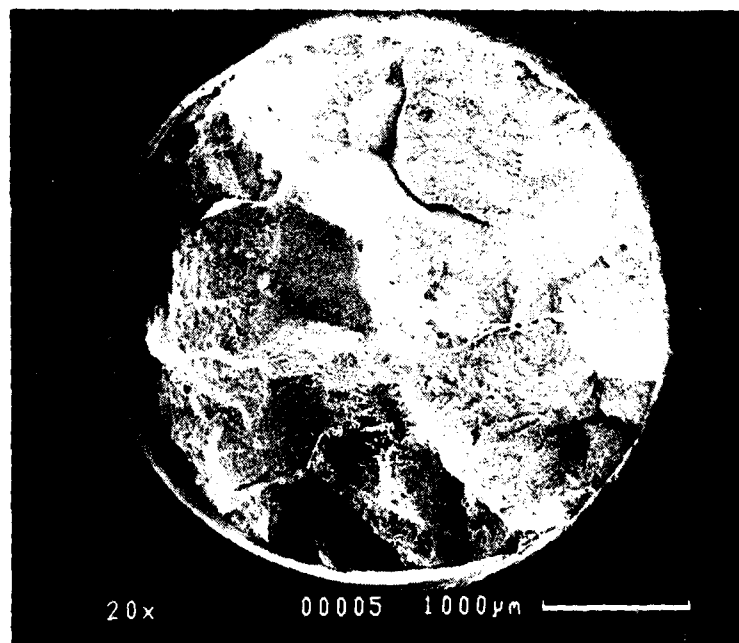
Fracture surface of Alloy 1 creep tested at 675°C showing mixed fracture modes.
